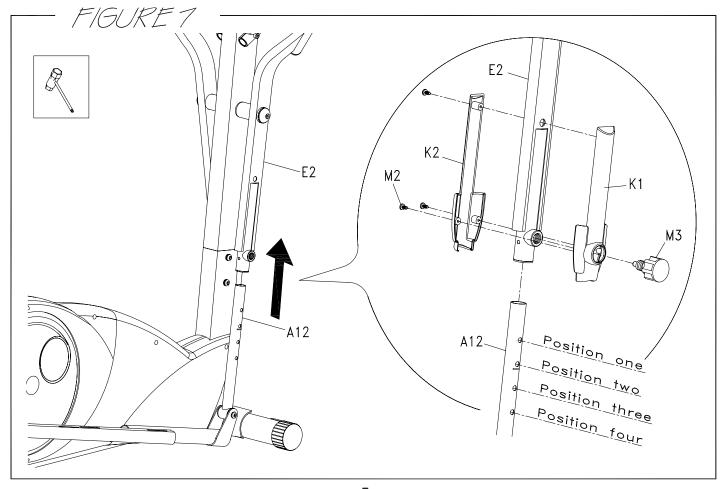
\_\_CONNECTING TUBE ASSEMBLY
